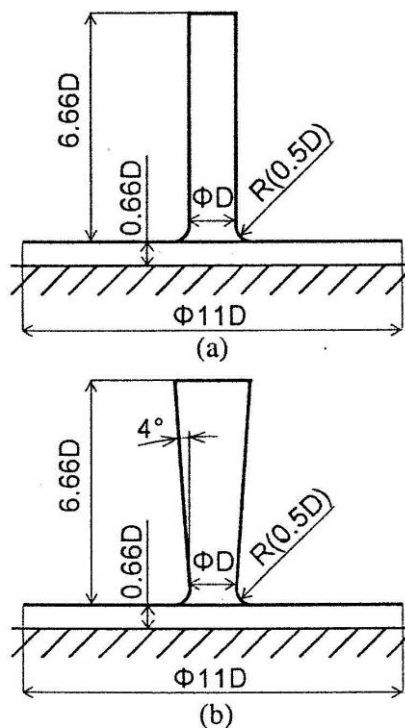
Dimensions of the experimental model ( $D = 60$  mm). (a) Cylindrical type tower and (b) Diffuser type tower.
